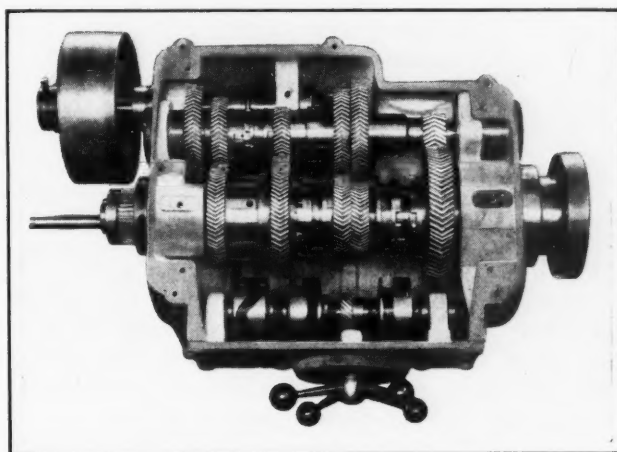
An Engine Lathe Gear-box in which Double Helical Gears are Used
